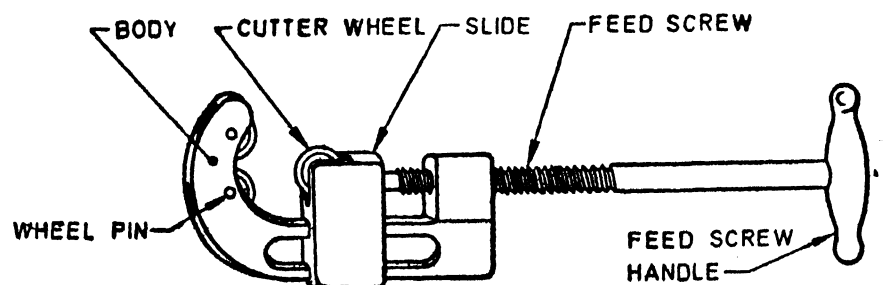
THREE-WHEEL TYPE PIPE CUTTER FOR CUTTING PIPE 9 TO 60 mm DIAMETER INCLUSIVE, TYPICAL
